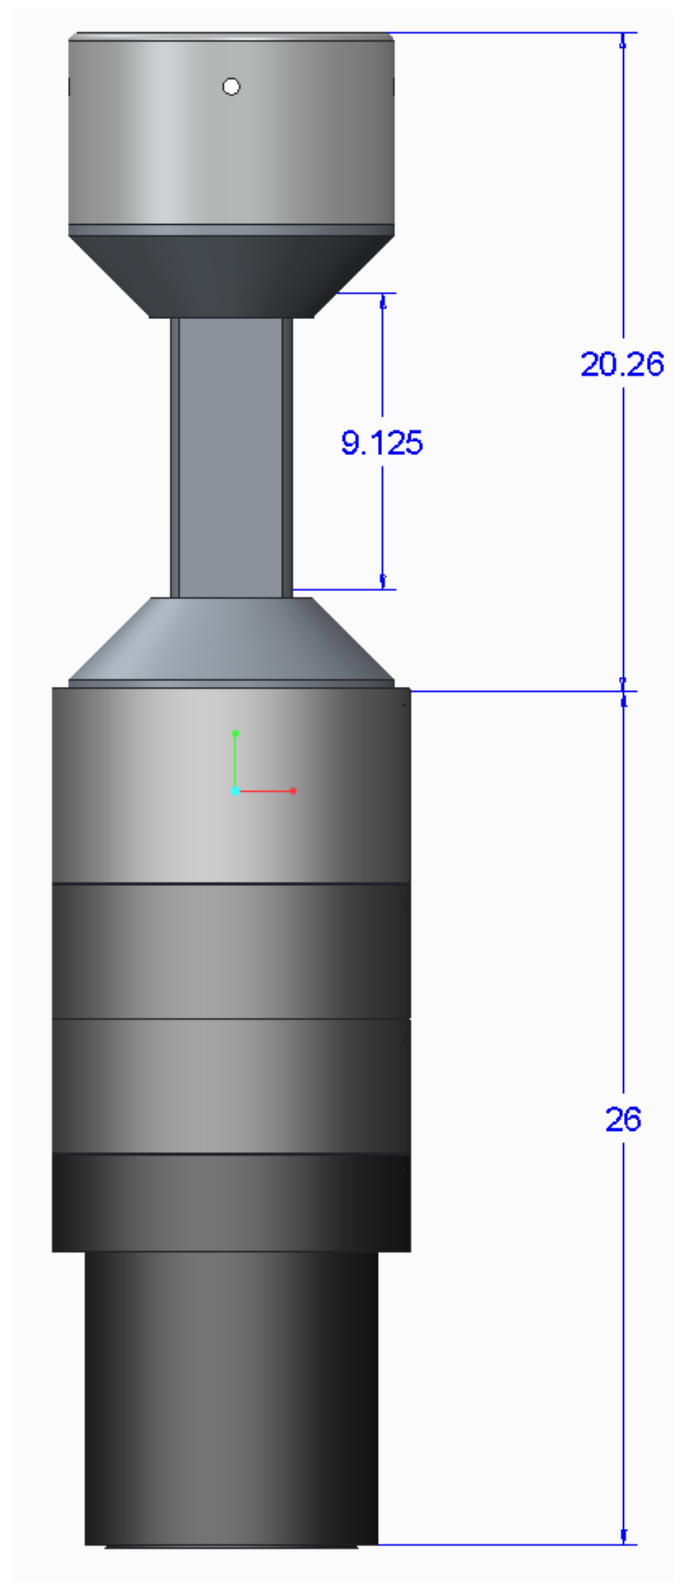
A front view of the revised mold stack. The overall dimension from the bottom places the mold at the appropriate height in the coils. (The bottom coil starts at 27" from the bottom). The total mold stack height remains nearly identical. The internal ingot height is shown as 9.125 inches. The remaining 0.125 inches compared to the goal height is compensation for shrinkage as well as a small machining margin.
